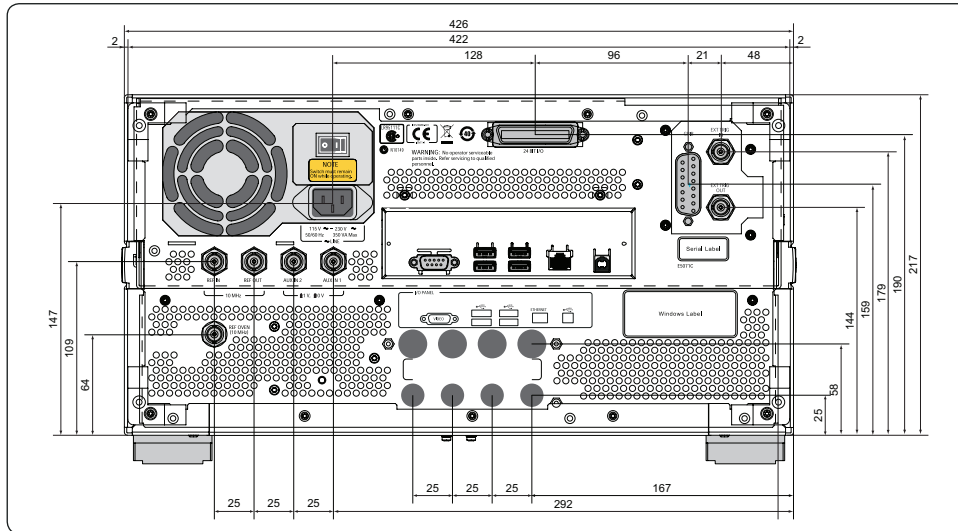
Dimensions (rear view with Option 1E5, in millimeters)
